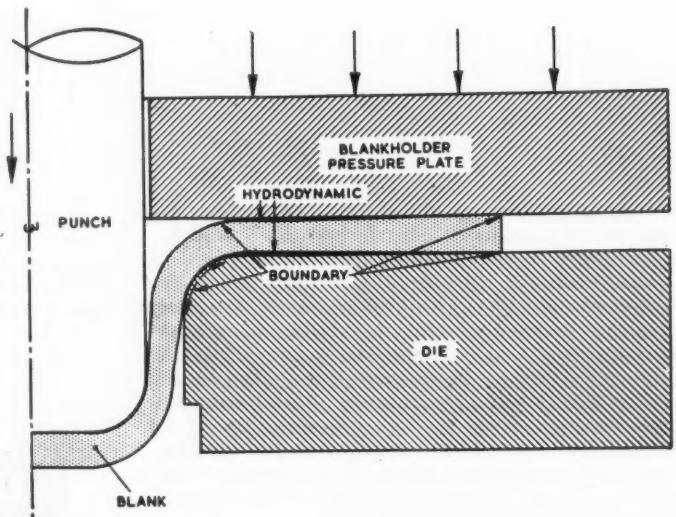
(a) (right). Use of elevated blankholder loads in deep drawing — section of drawing tool showing probable conditions of lubrication.
